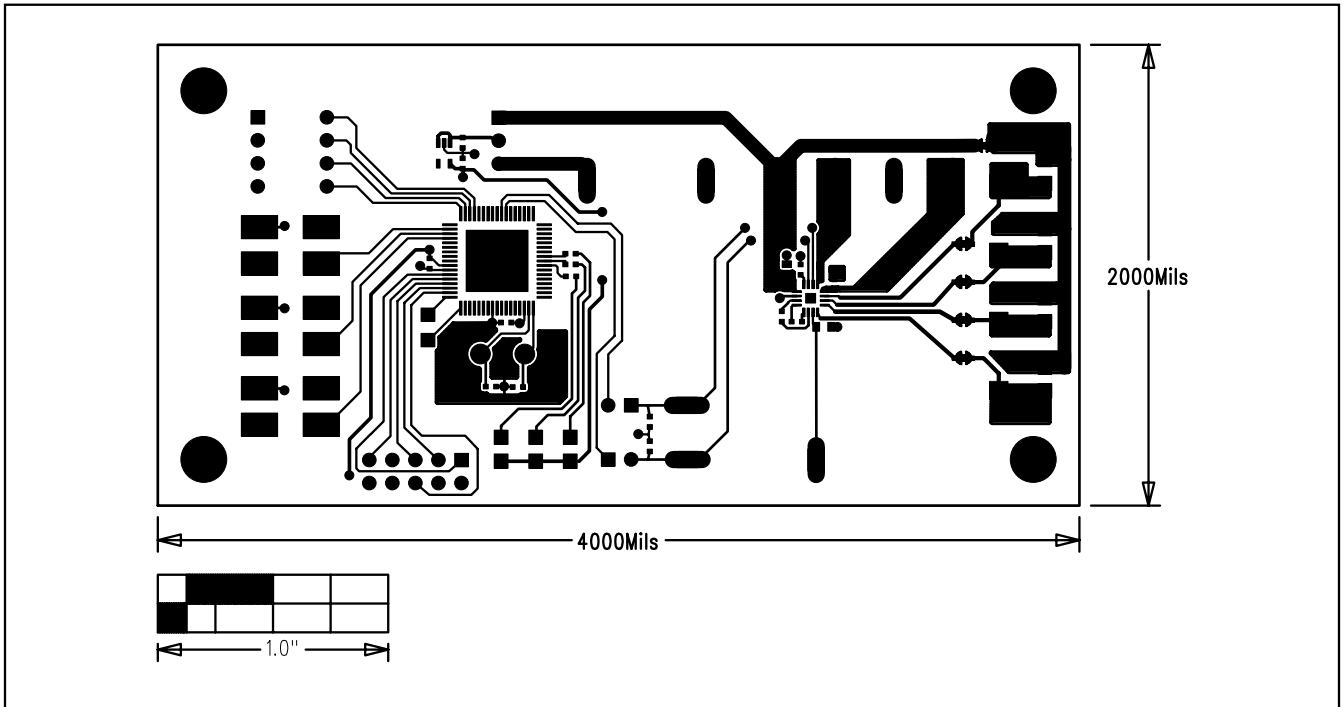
MAX8822 EV Kit PCB Layout—Component Side
